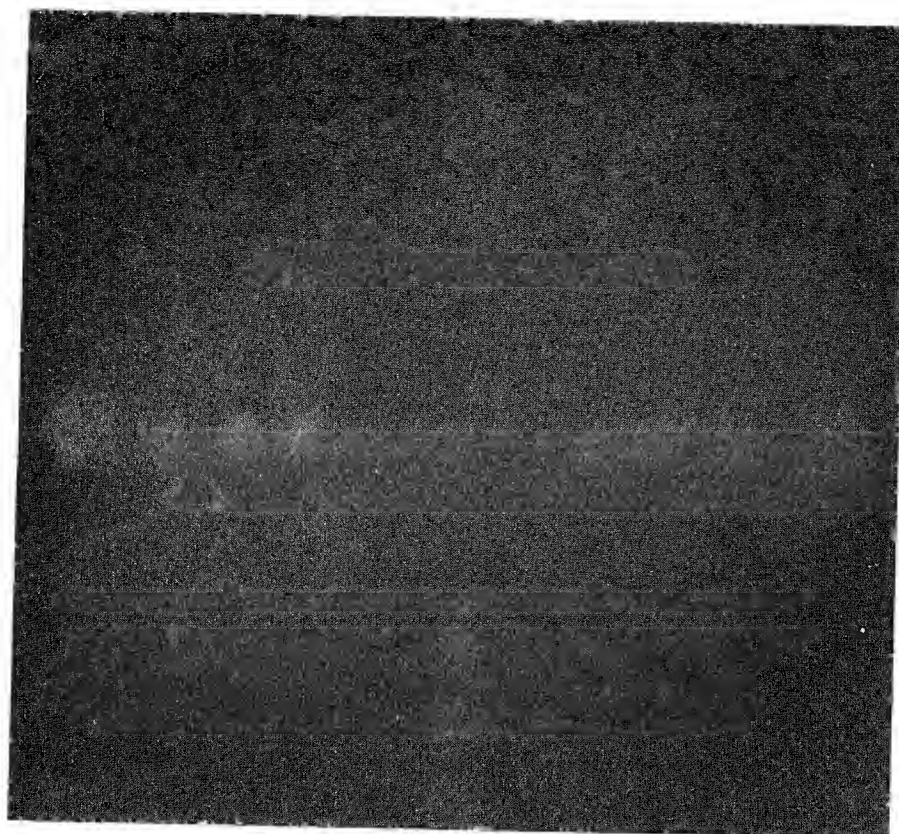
Penetration by radium of 6 in. of lead. Exposure 41 hours. Radium 9 in. from film. (Details of arrangement of holes in this specimen are shown in Fig. 17.)
